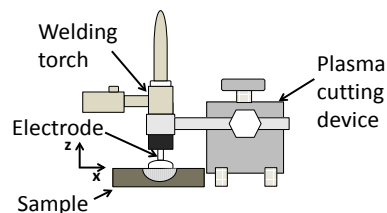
Adaptation of the welding torch to plasma cutting device
